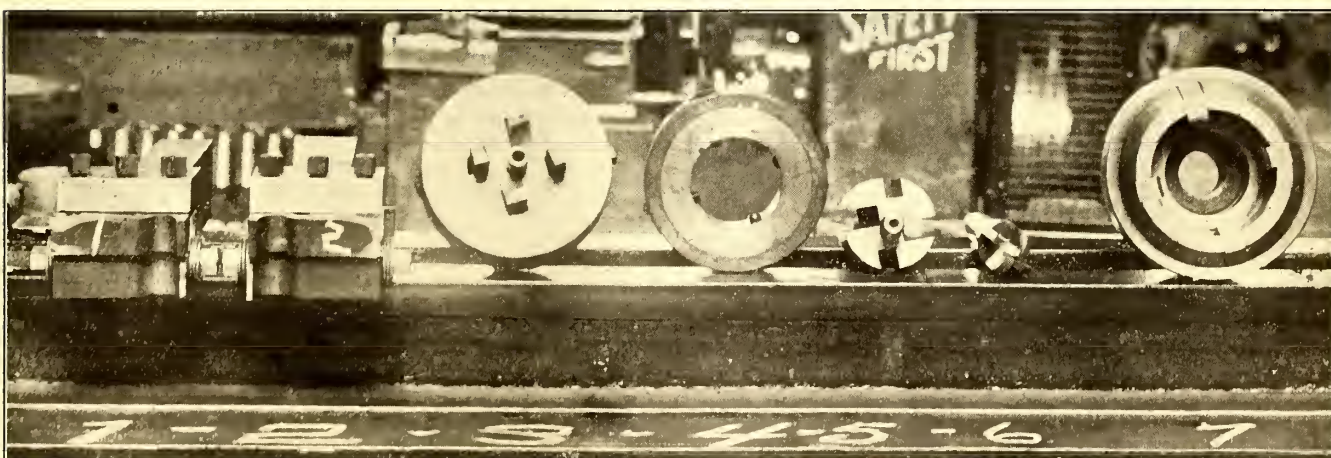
TOOLS MADE AND USED IN COLD SPRING SHOPS, INTERNATIONAL RAILWAY—1, 2, PAIR OF FLANGING TOOLS FOR TIRE LATHE; 3, 4, 5, TOOL FOR SURFACING END OF BALL HANGER; 6, TOOL FOR FORMING SPHERICAL SEAT FOR BALL HANGER; 7, SELF-CENTERING CHUCK FOR TROLLEY WHEEL
